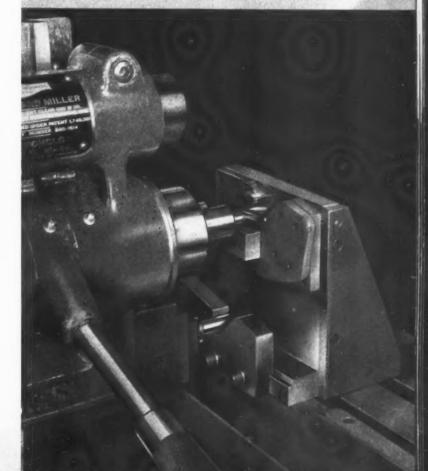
Hand Milling Machine Applied to the Milling of Cam Slots in Steel Plates through the Provision of a Guide Roller and Templet for Controlling the Cutter Movements
